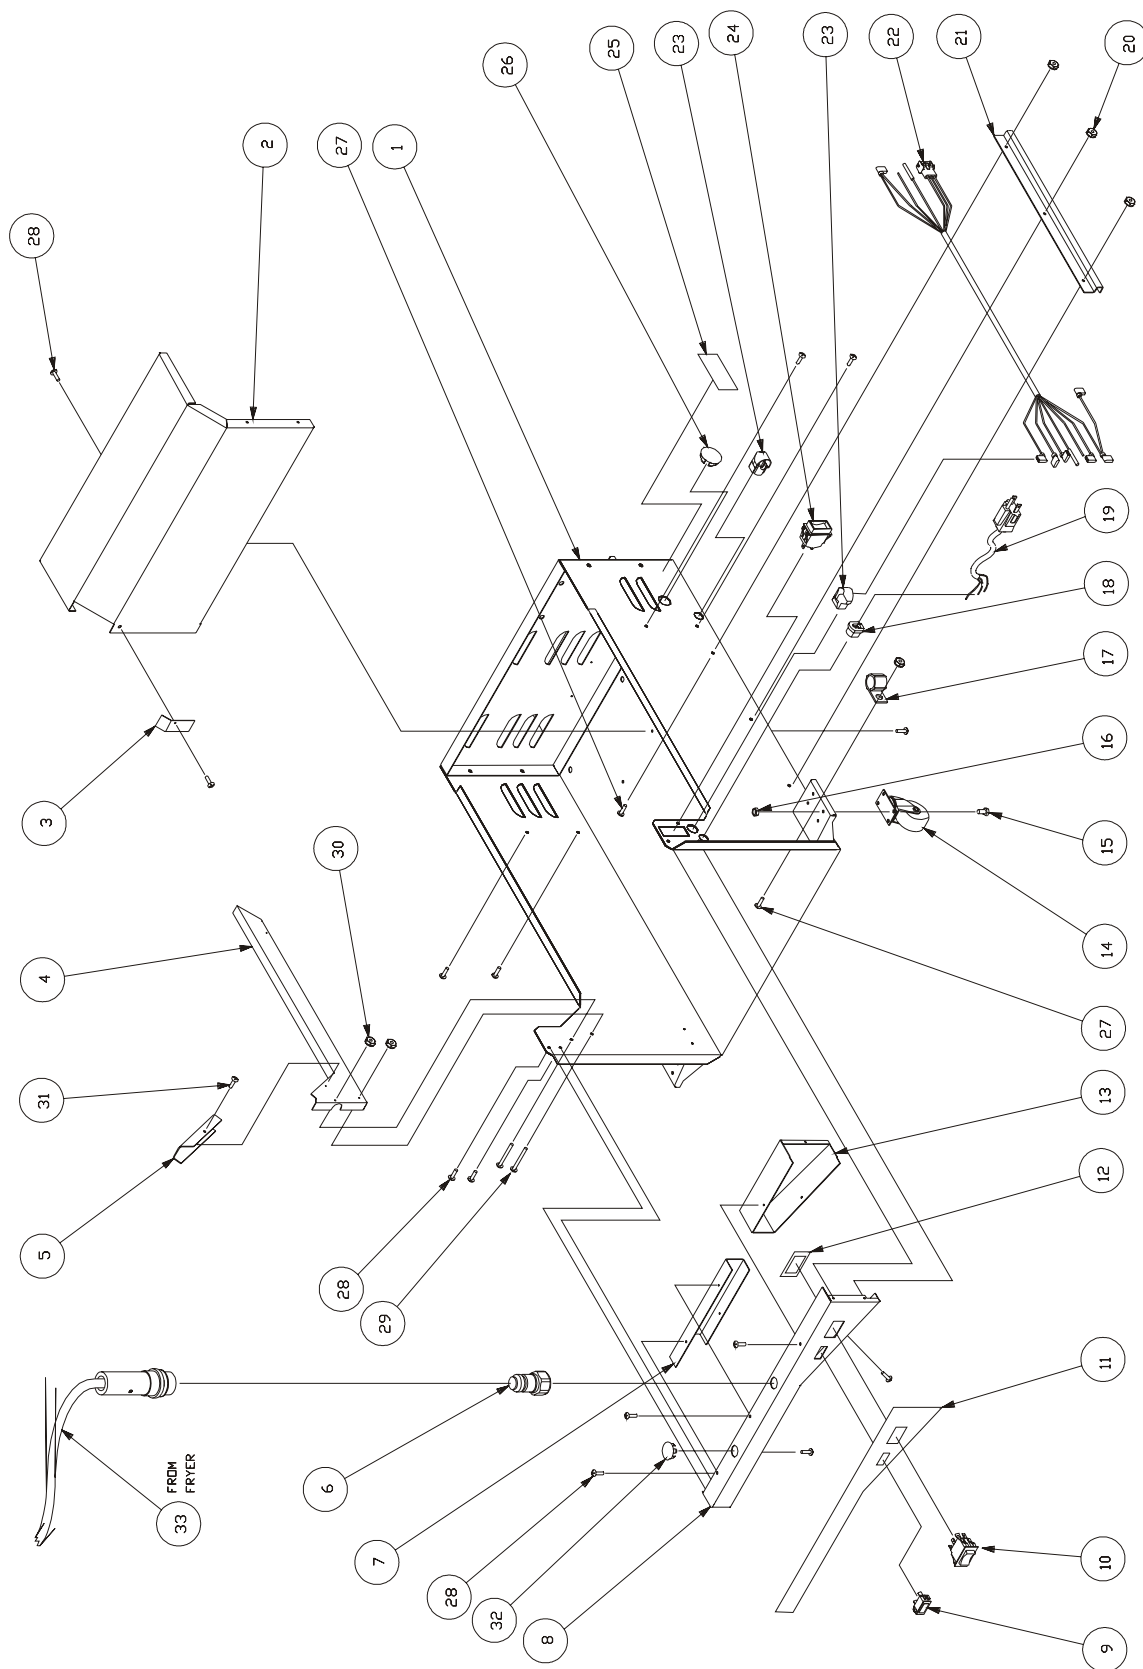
UFM Filter, Frame/Electrical Assembly
